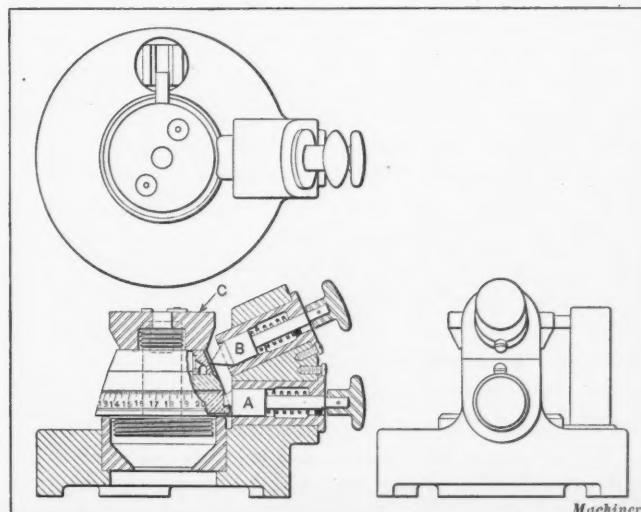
Jig for drilling Holes in which Pins are inserted to hold Upper Fuse Ring in Position
